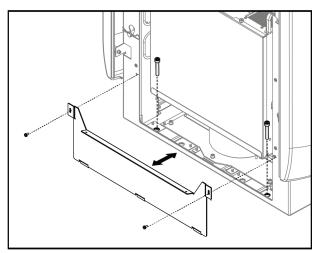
Removing the kick plate and accessing the anchor bolt locations
